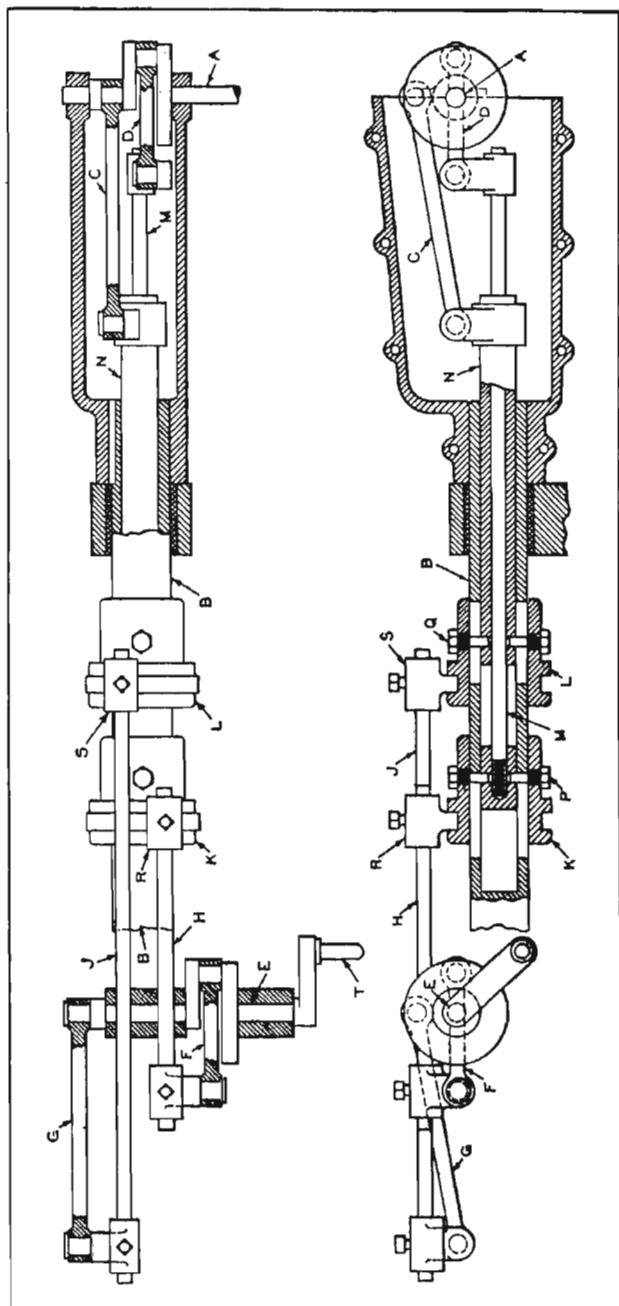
Crank-operated Control for Mechanism within Rotating Member.
